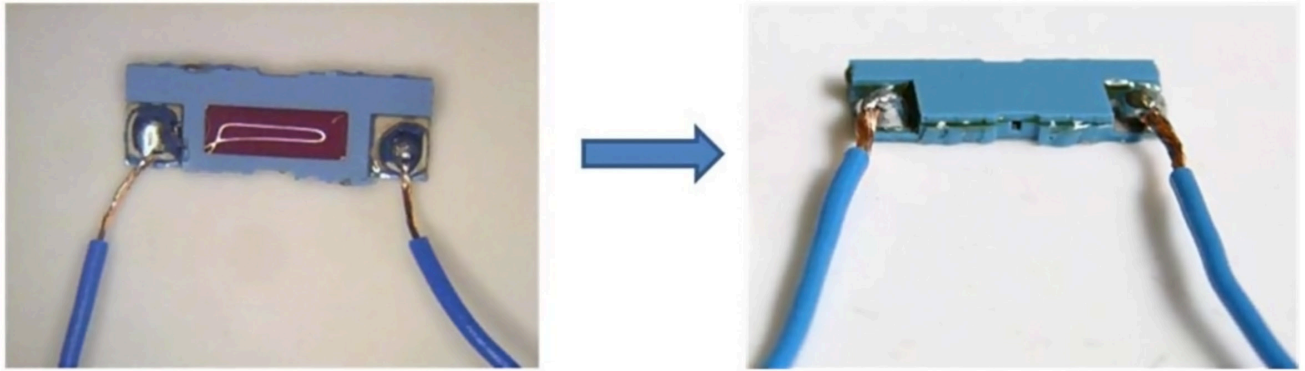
Propellant filling and gluing steps. The exhaust nozzle is clearly visible in the center on the right image.
